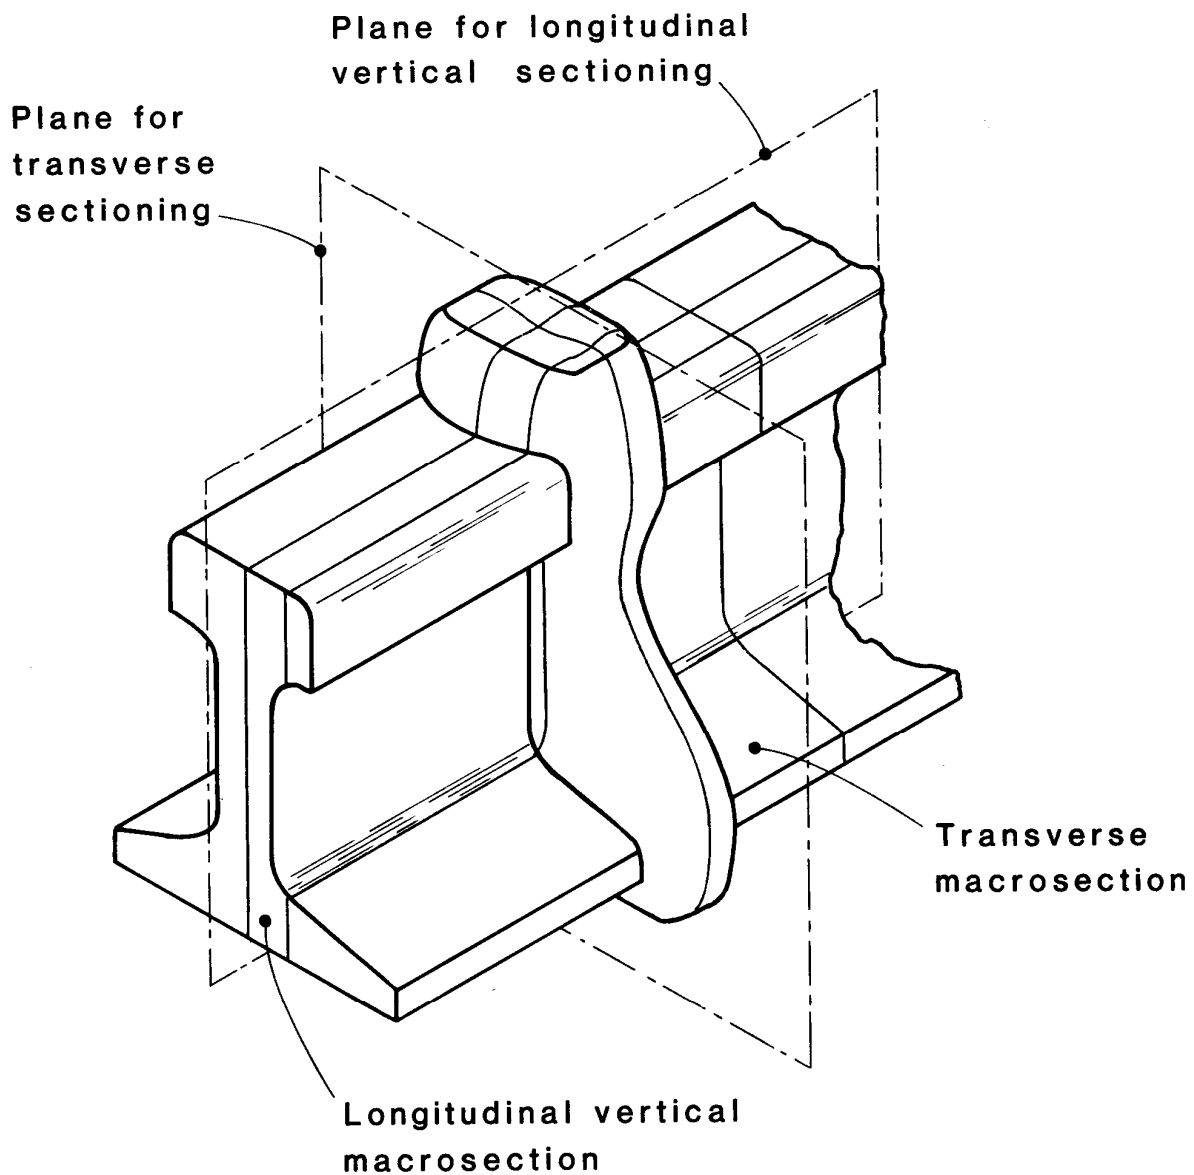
Method for sectioning rail and welds for test specimens.
